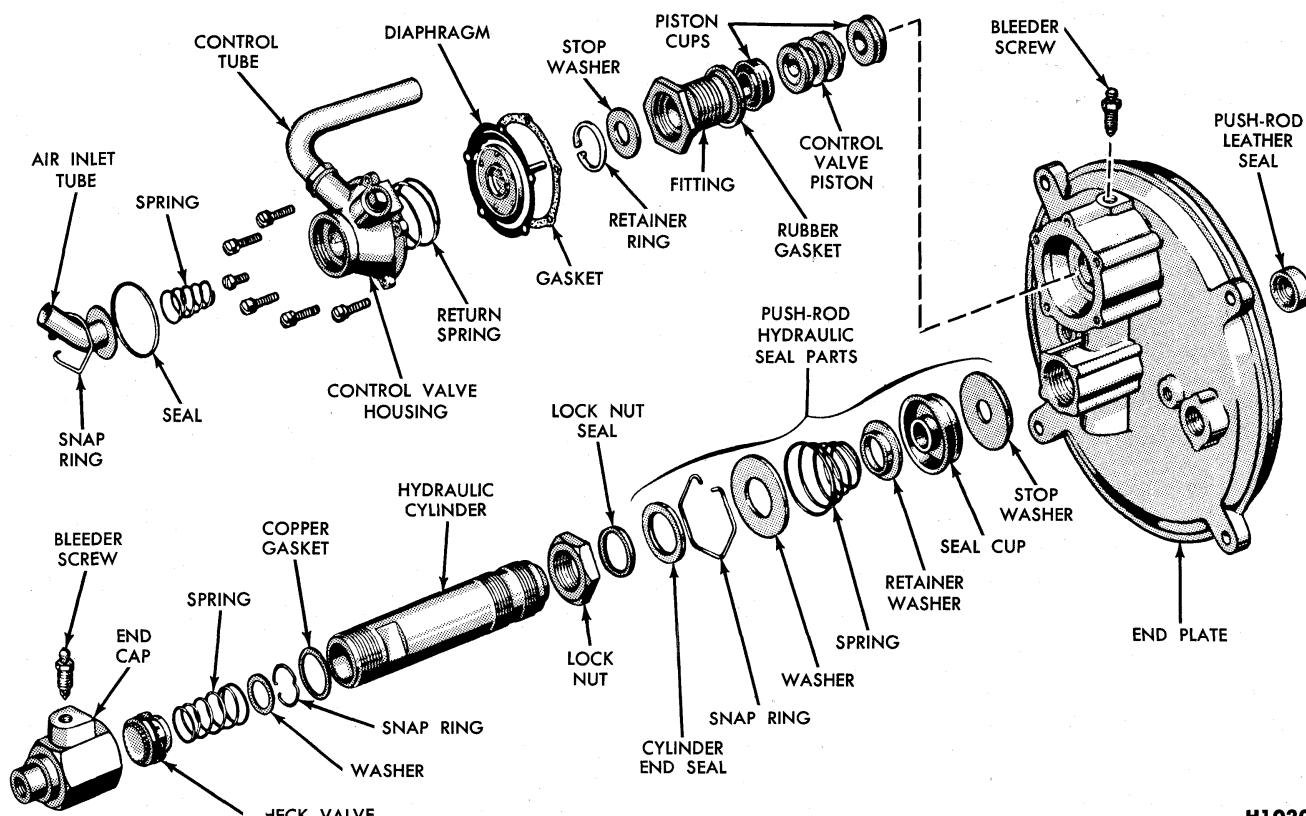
End Play Disassembled— $9\frac{1}{2}$ -Inch Booster
